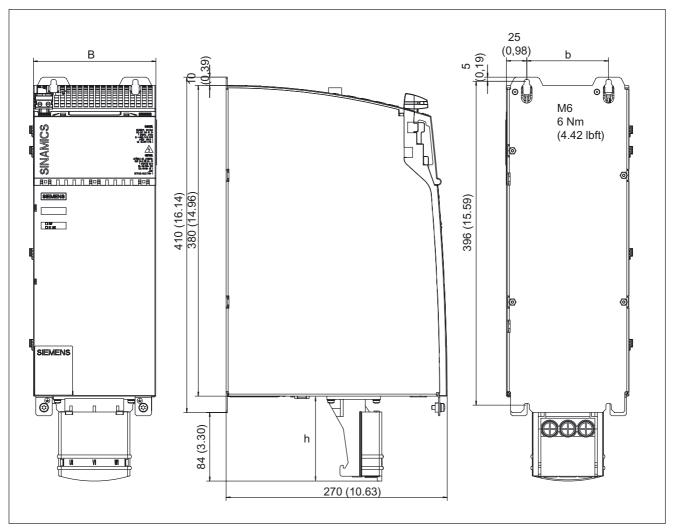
Dimension drawing of the Smart Line Module (36 kW) with internal air cooling
